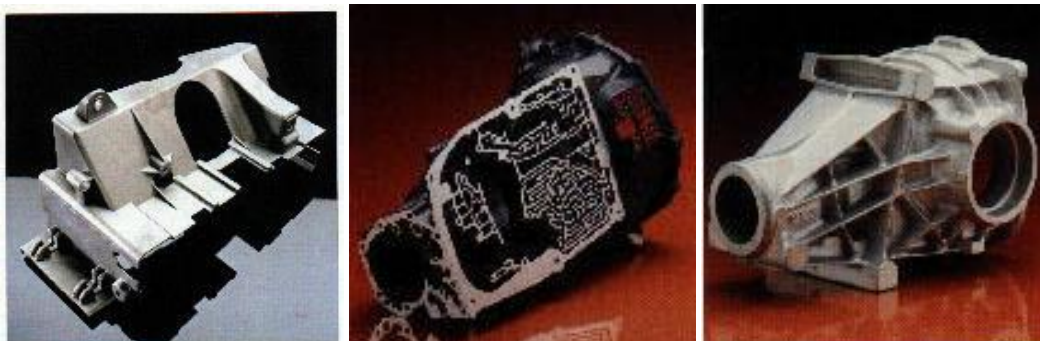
a) Inner turbo frame, b) Gearbox casing, and c) Rear axle housing [AA].
